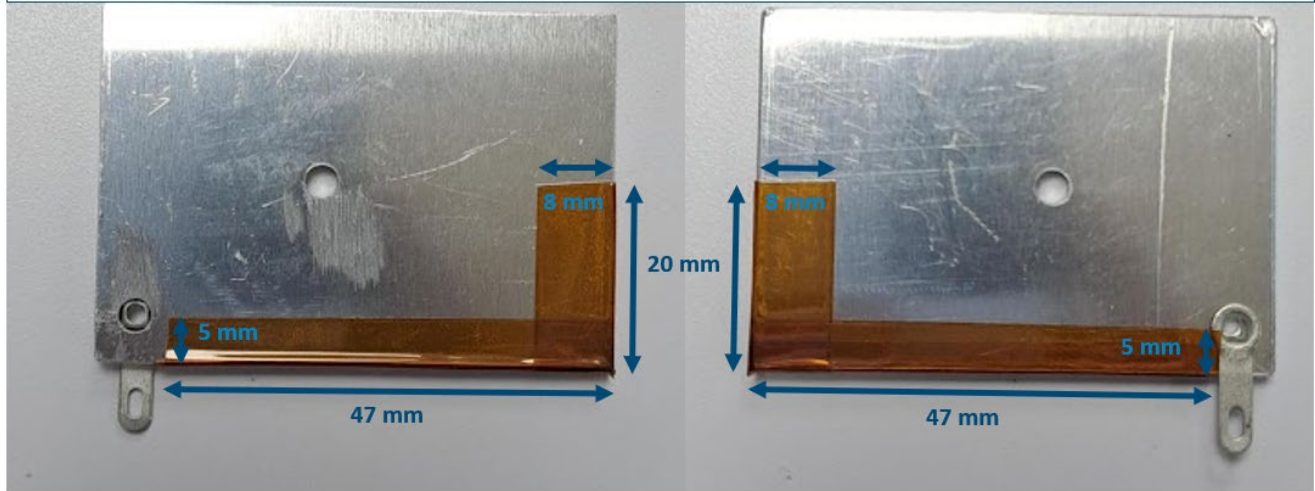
Additional TOPSwitchGaN IC Heatsink Assembly Instructions.
